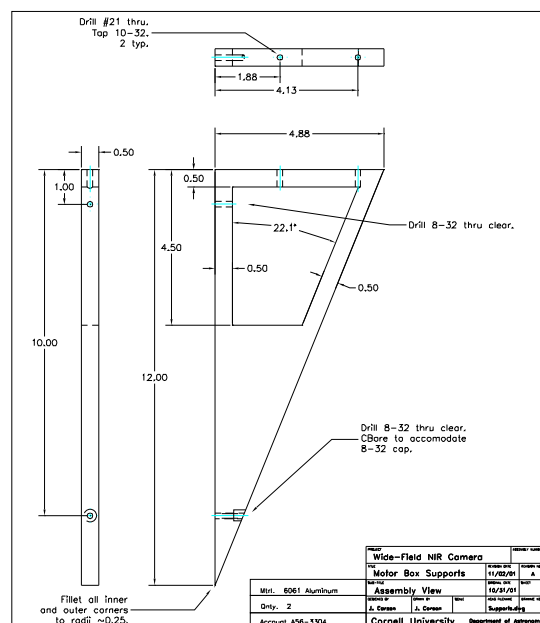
Motor Controller Box Supports. These pieces provide a support interface between the Motor Controller Box Adaptor Plate and the Motor Controller Box.
